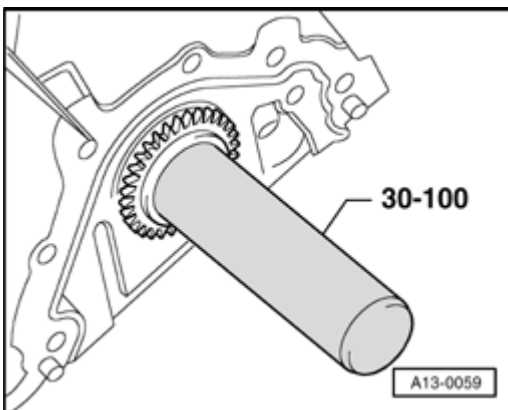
Installing Chain Sprocket Onto Crankshaft Up To Limit Stop Using Press Tube 30-100
